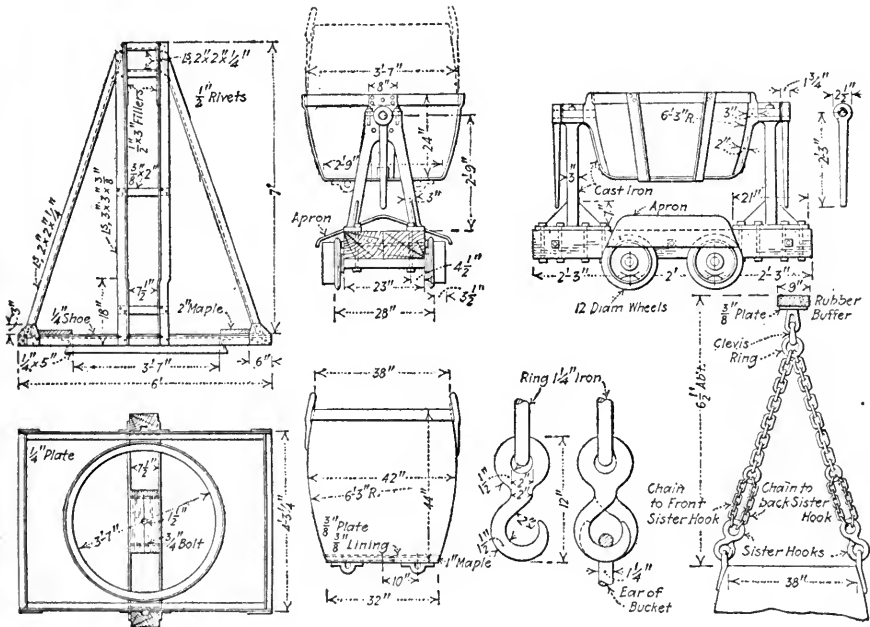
DETAILS OF HANCOCK BUCKET CAGE AND LANDING CAR.
